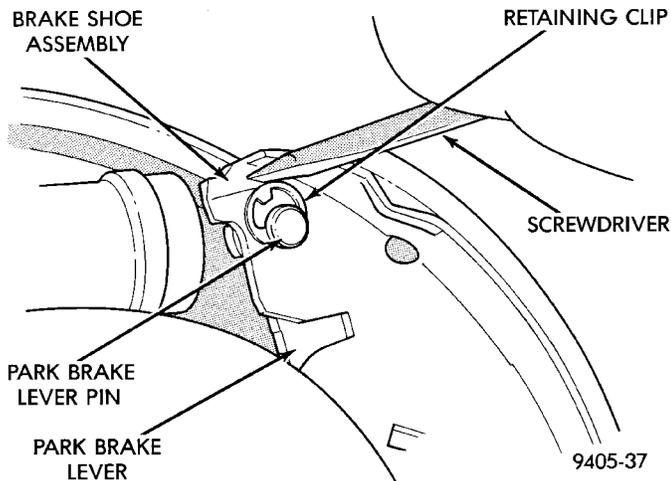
Park Brake Lever Pin Retaining Clip Installation
